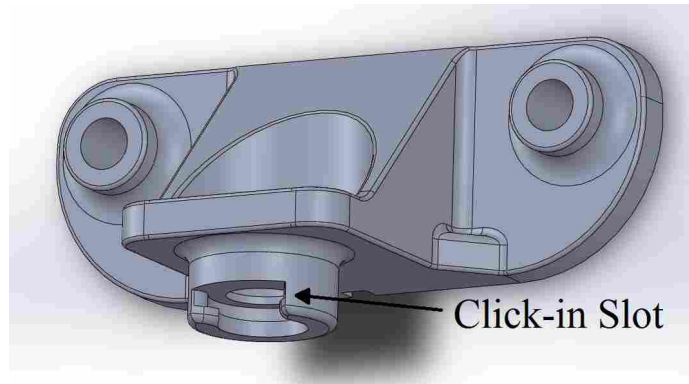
CAD drawing of the testing proximal mount with the tube click-in slot labeled
